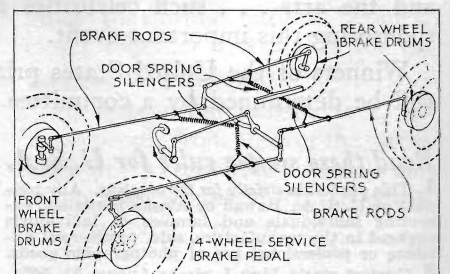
Old screen door springs can be adjusted to your car to stop brake rattling.
